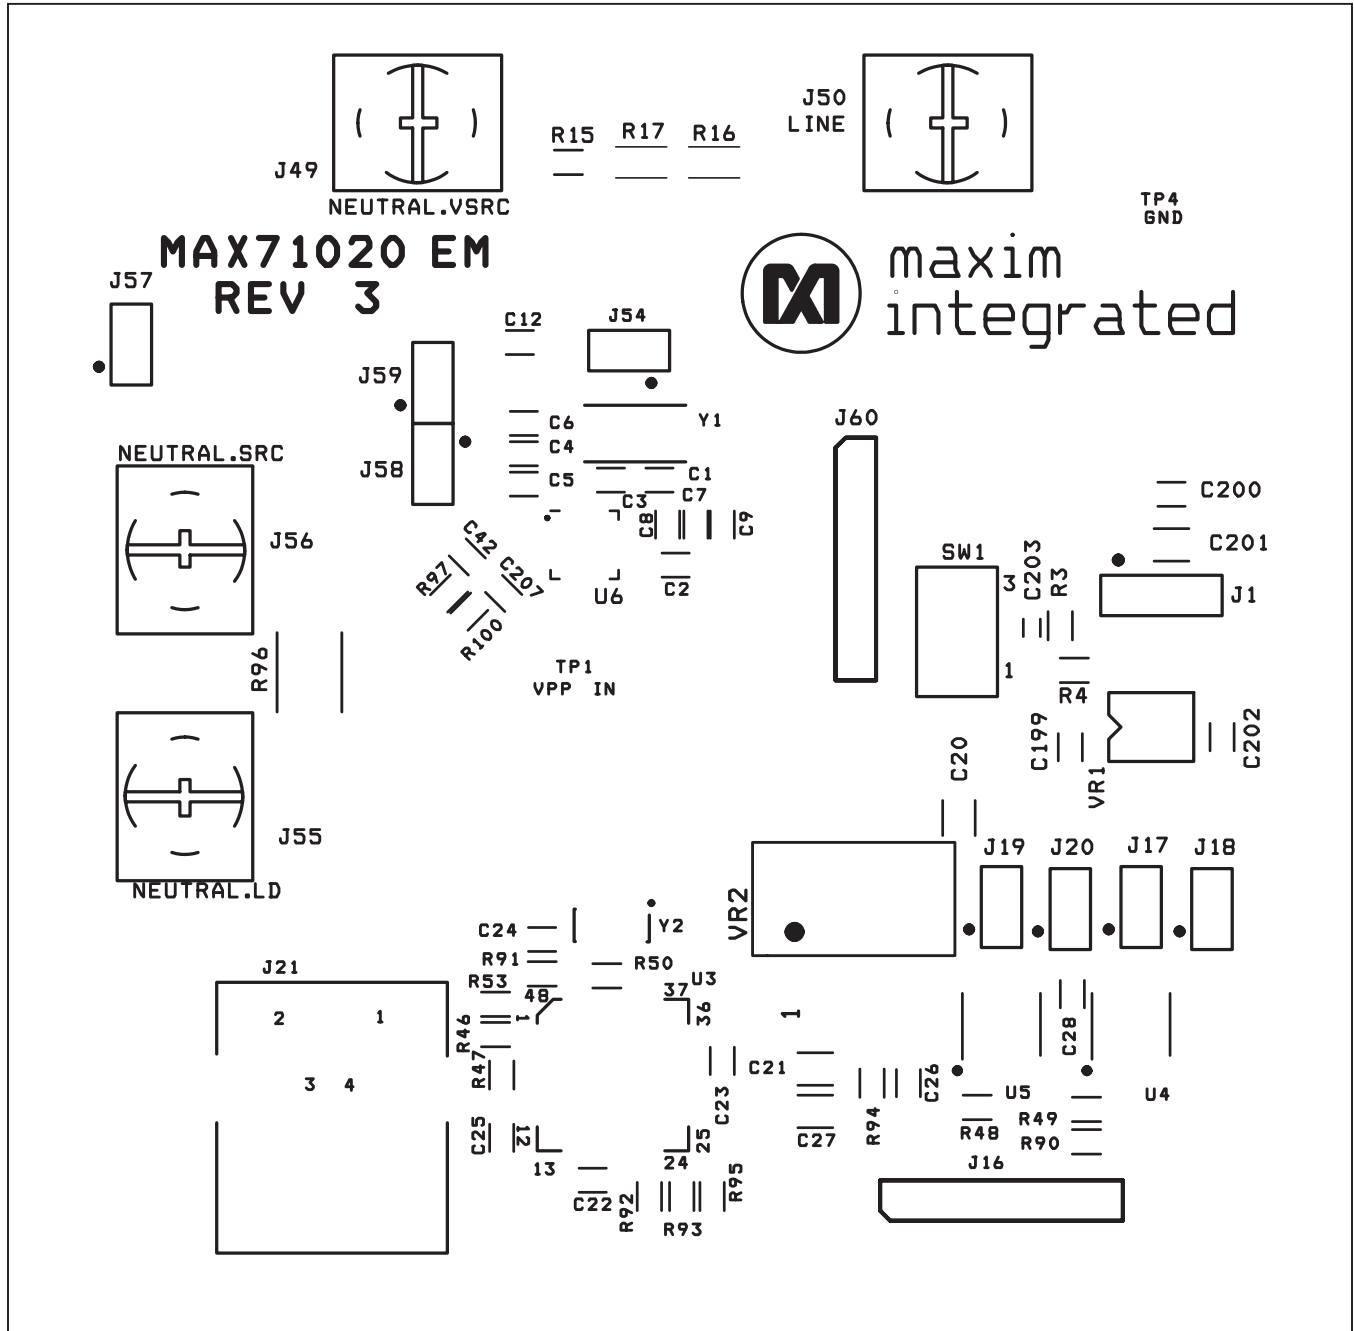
MAX71020A EV Board Layout—Top Silkscreen
